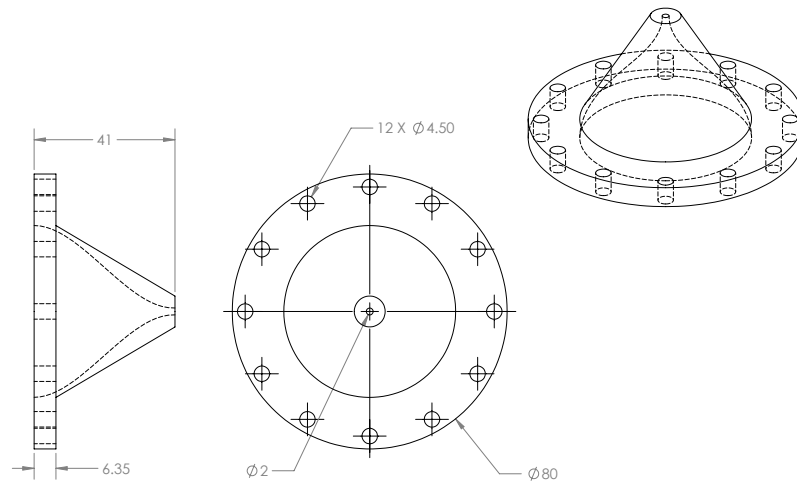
A drawing of the nozzle showing the third order polynomial interior surface.
